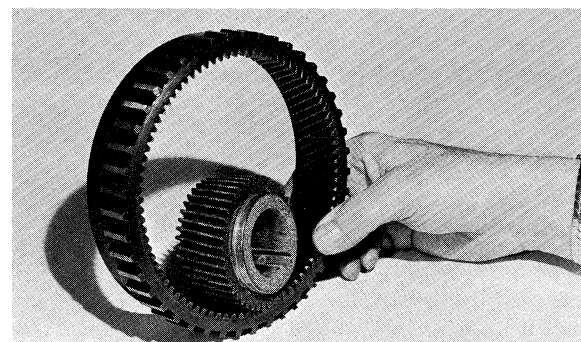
Relationship of honing tool and work gear with internal gear tooth honing.
